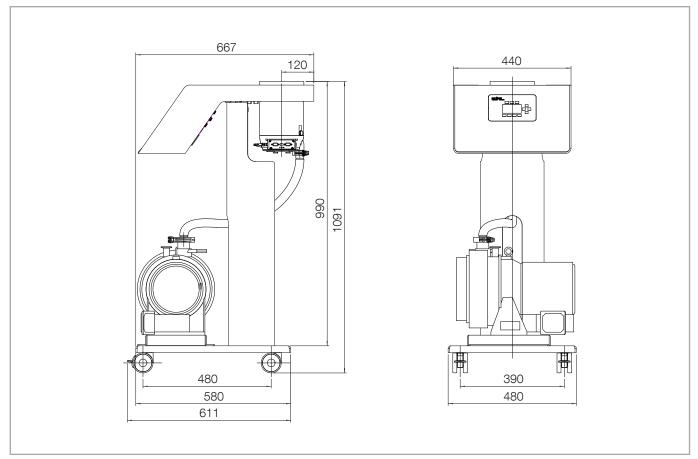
Dimensional drawing TURBOLAB 350/450 Cart, dimensions in mm
